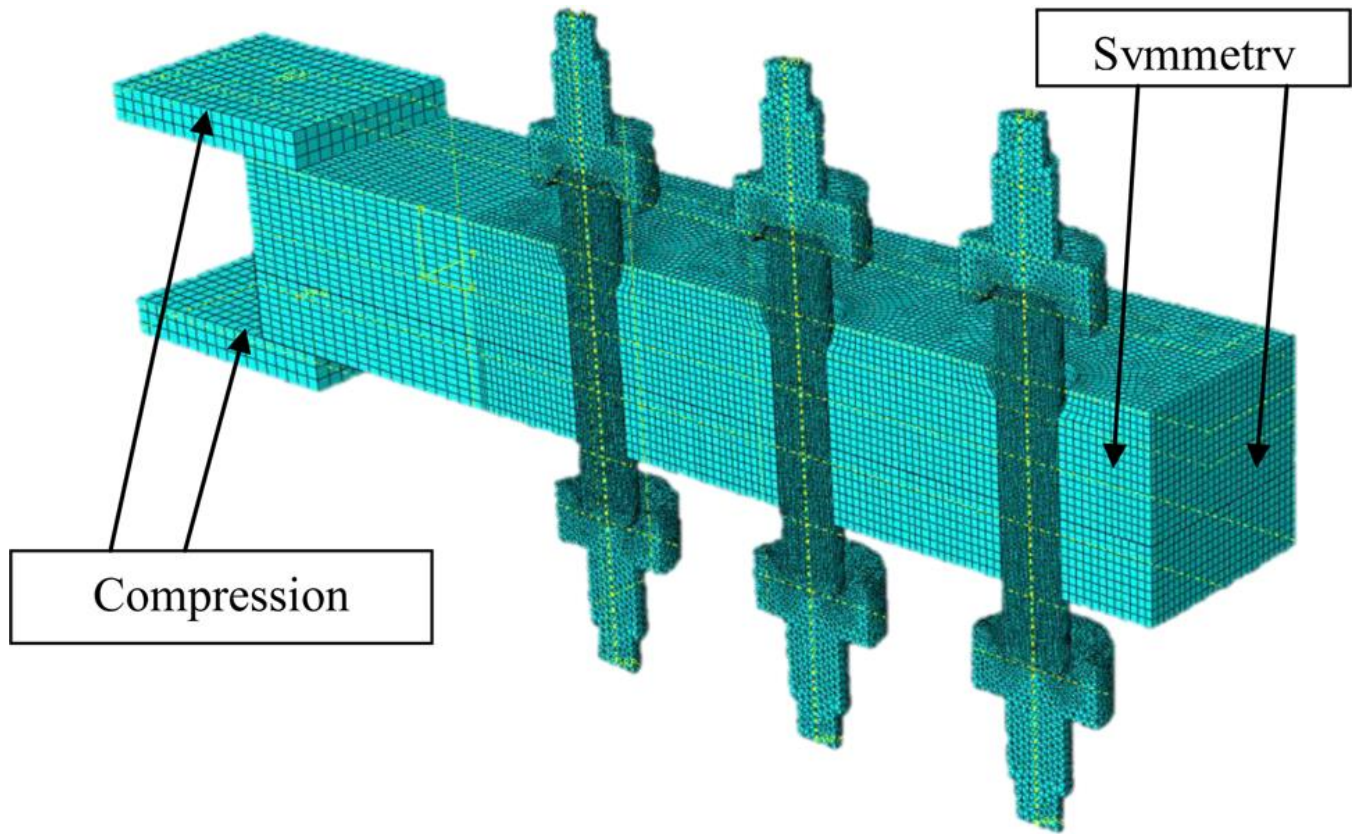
Nonlinear finite element model for simulating the insertion of rivets on small panel assembly (type 1)
